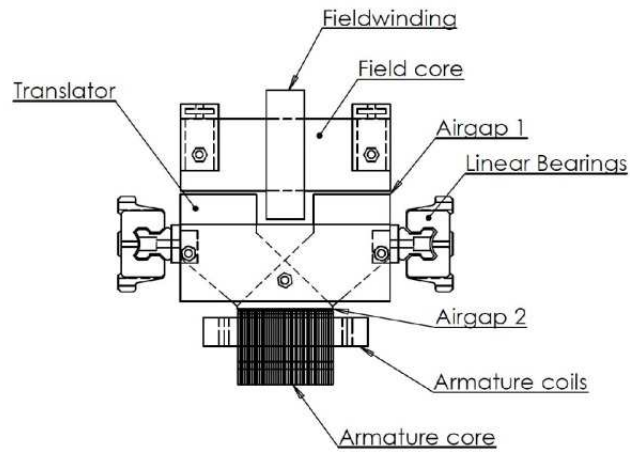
Front view of linear claw pole prototype active topology including bearings
